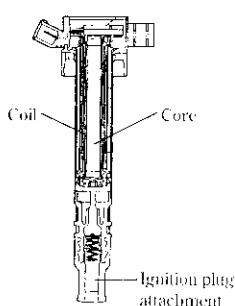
Cutaway drawing of stick type ignition coil¹⁰⁾
